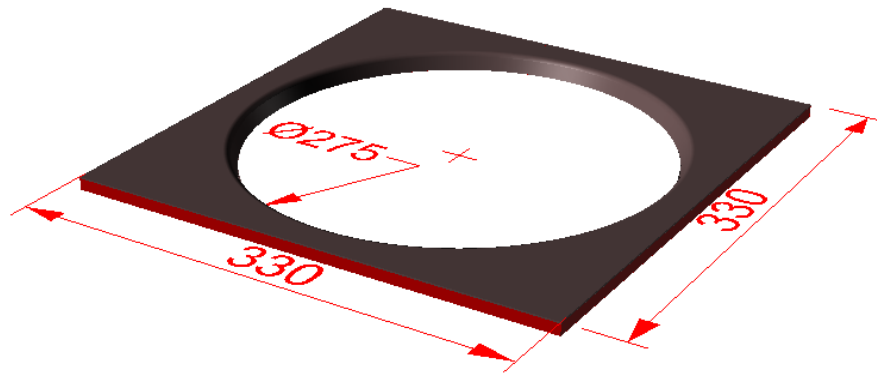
Full scale driver hole prototype (dimensions in millimetres)
